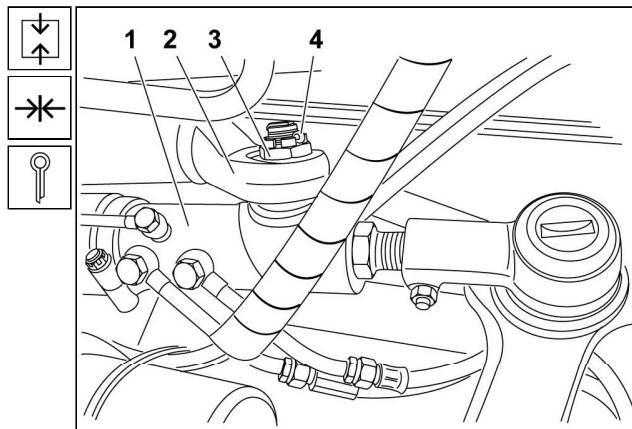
Connection of power cylinder pull rod with booster - installation
